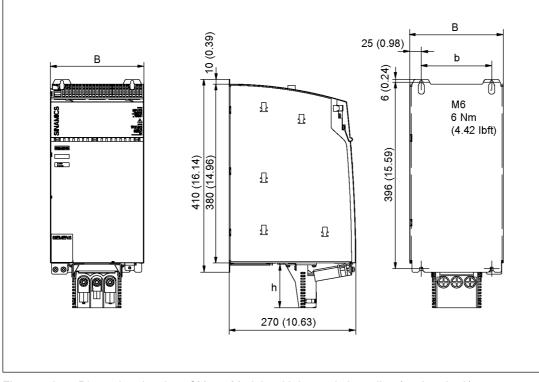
Dimension drawing of Motor Module with internal air cooling (45 A to 85 A)
